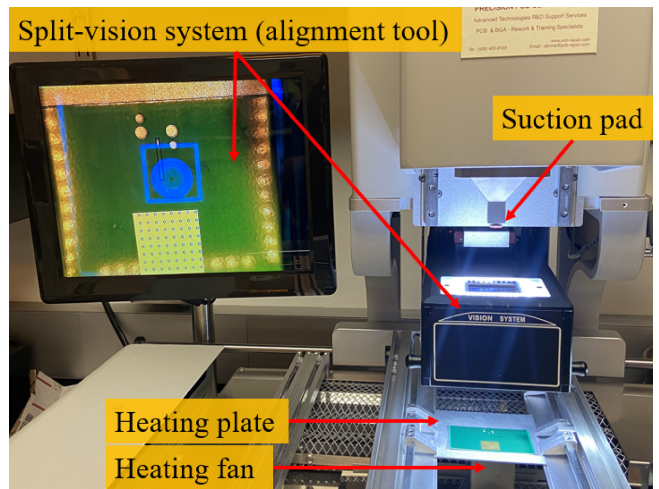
Assembly process for the AiP Integration: the Shuttle Star BGA Rework Station (RW-SV550) with key tools labeled.
